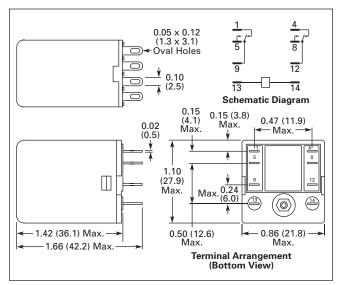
D2PR2 — Approximate Dimensions in Inches (mm)
